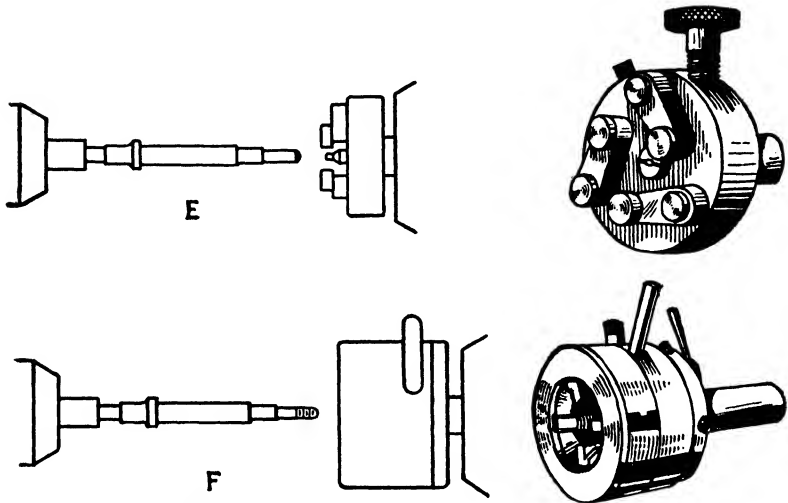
(Continued).—Tools for bar works. *E*, center drill with roller support; *F*, releasing threading die.
